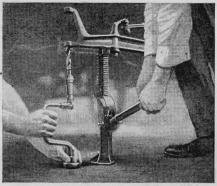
Using weight of the car, controlled by a jack, to feed drill into hole for kingpin bolt
